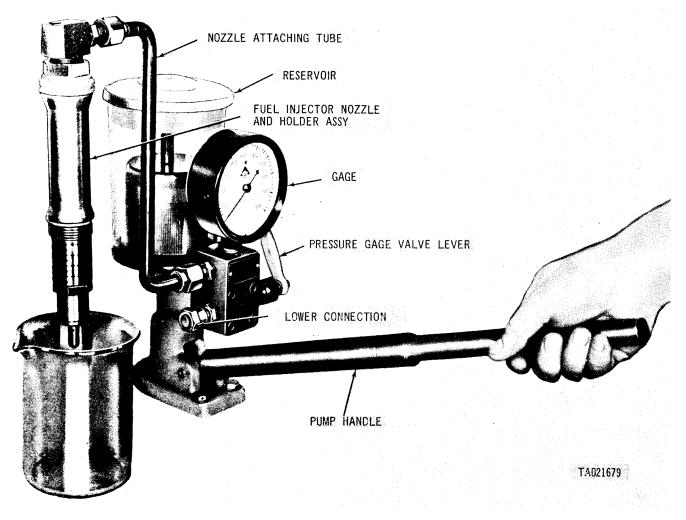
Testing fuel injector nozzle and holder assembly.
